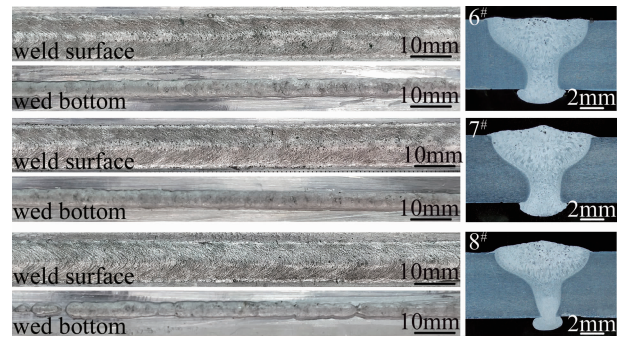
Macroscopic morphology of joints and weld junction under different groove type
